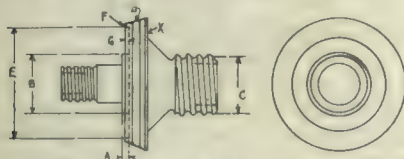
OUTLINE DRAWING OF FUSE BODY.
